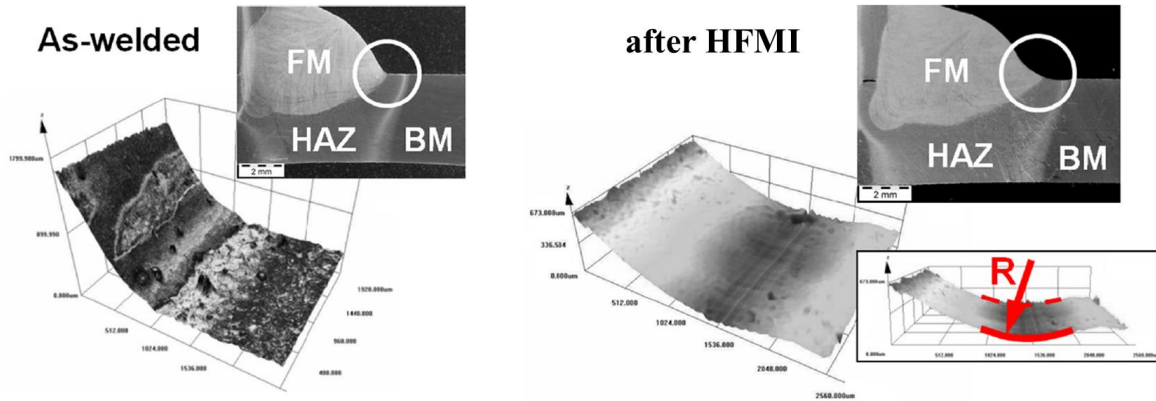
Improvement of weld toe shape by HFMI [86].
